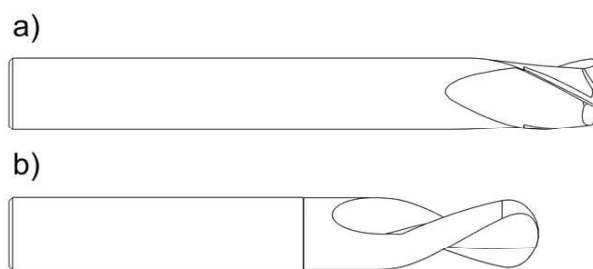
Tools used for tests a) lens-shape end mill EMUGE FRANKEN 3544L.10020A b) ball end mill Sandvik Coromant R216.42-10030-AC19P 1620
